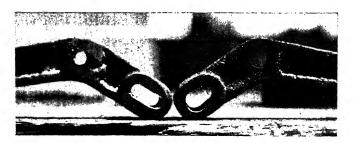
Holes that become worn (right) are quickly built up with bronze and redrilled to original size (left).
